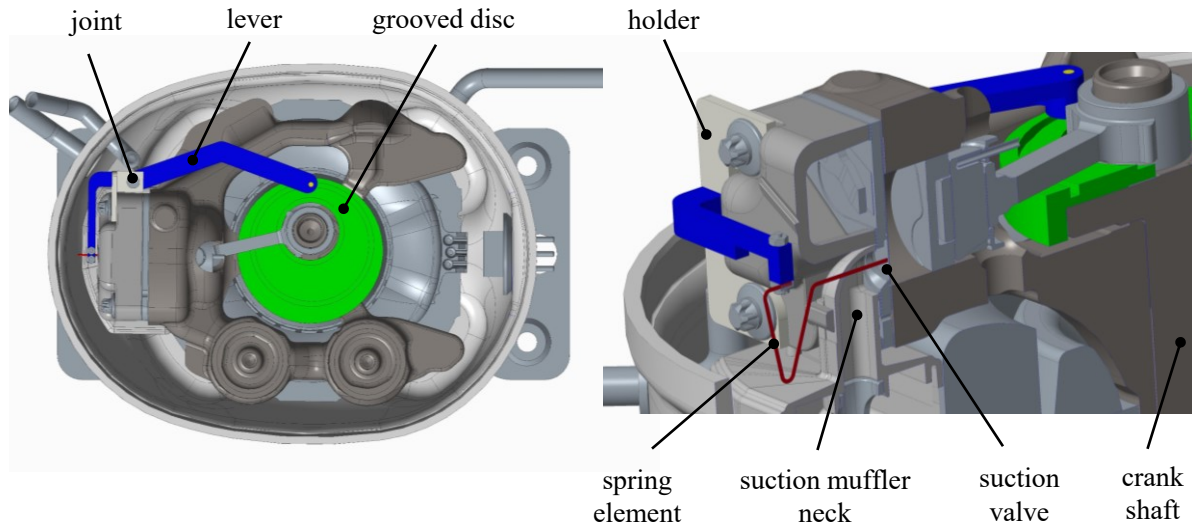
Hermetic reciprocating compressor equipped with a MASV mechanism [22].
